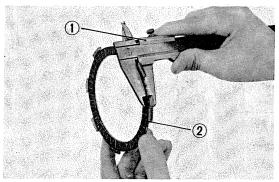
① Vernier caliper gauge ② Clutch friction disc
